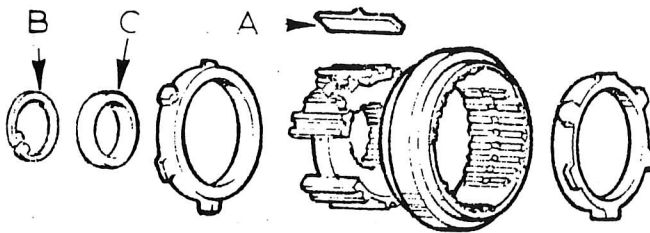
3rd./4th. SYNCHRONISER ASSEMBLY
